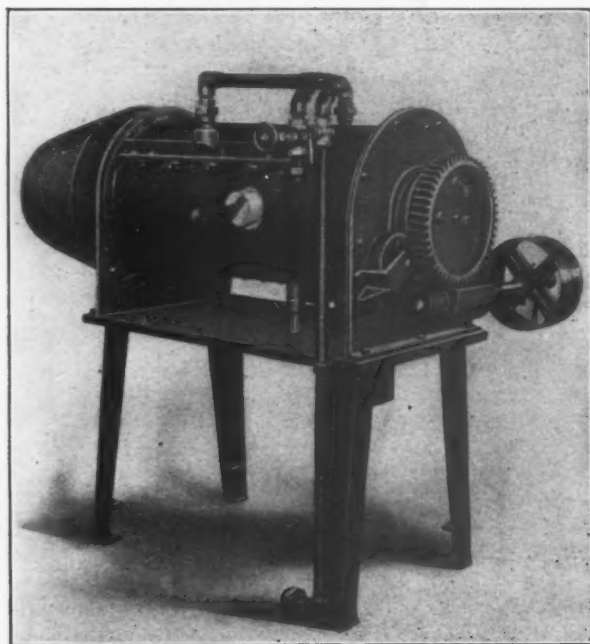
A Machine Which May Be Used in Place of the Carbonizer for the Reheating.
